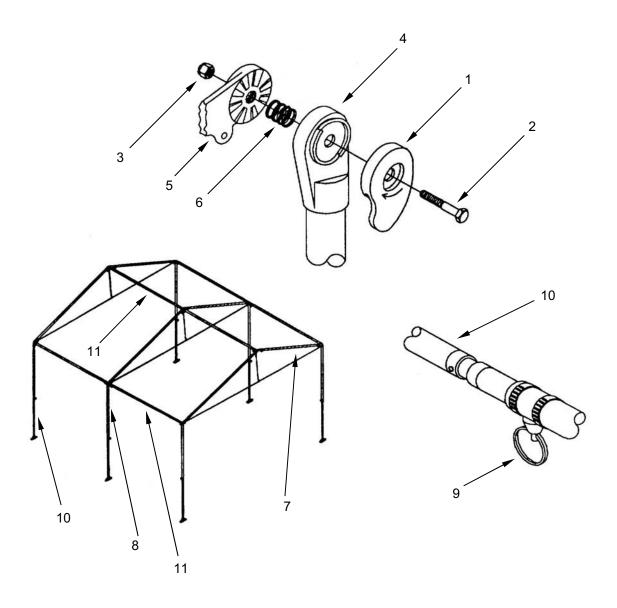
Repair Handle, Rafter Assembly, Upper Leg Assembly, or Purlin.
